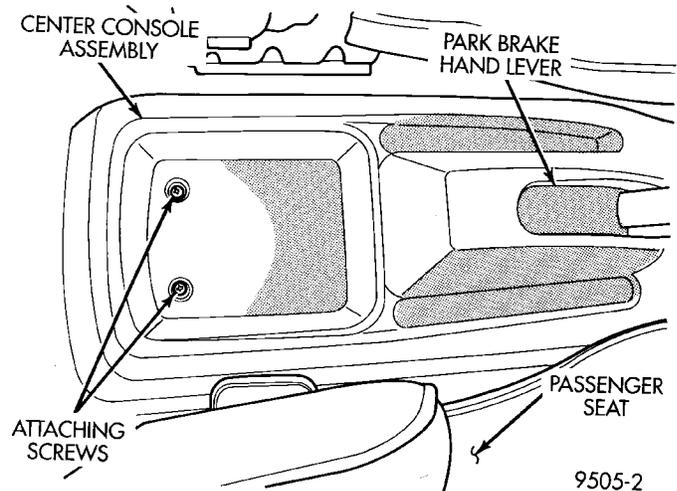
Attaching Screws At Rear Of Center Console With/Without Arm Rest
